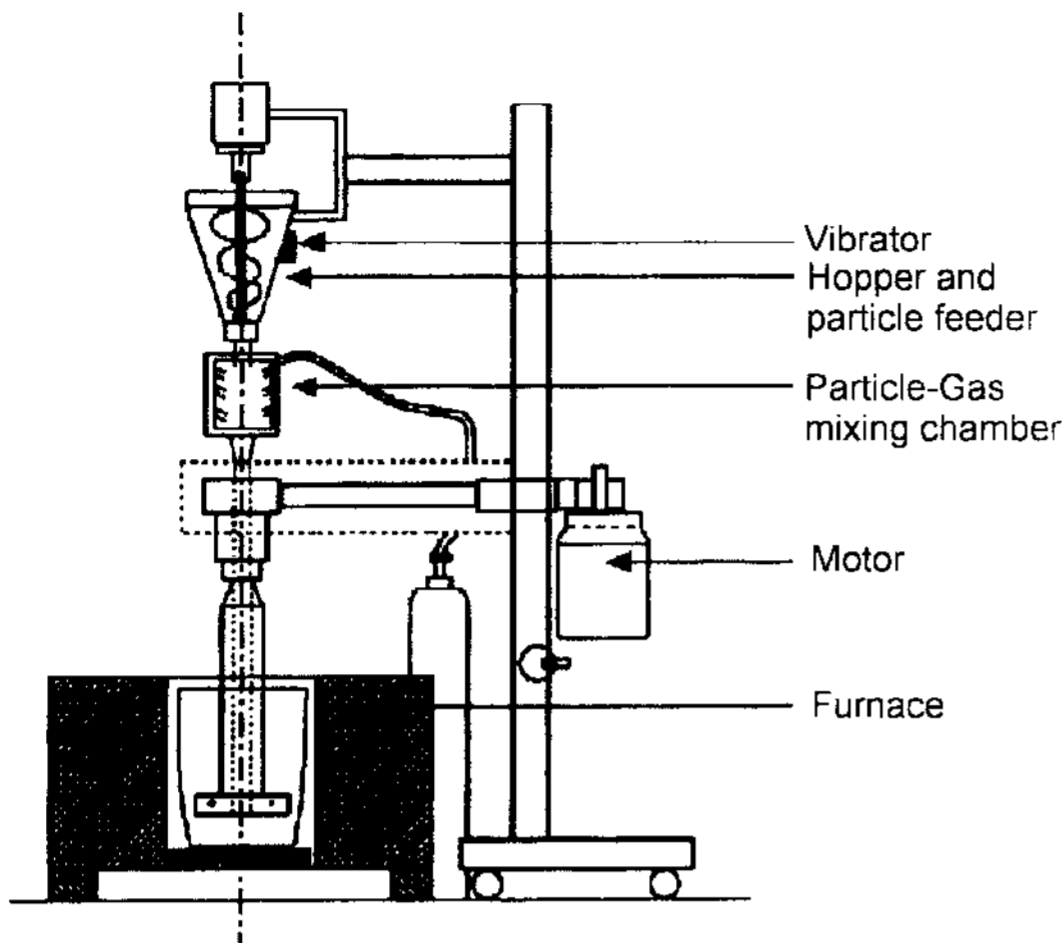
Schematic drawing of the stir-casting equipment for gas-particle co-injection method.
